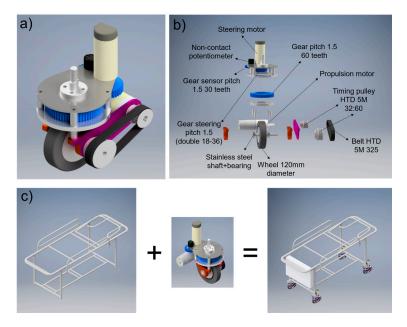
(a) Swerve drive module; (b) Exploded view of the swerve drive module showing its major parts; and (c) Concept of the modification of usual hospital beds into motorized ones by adding the swerve drive module.
